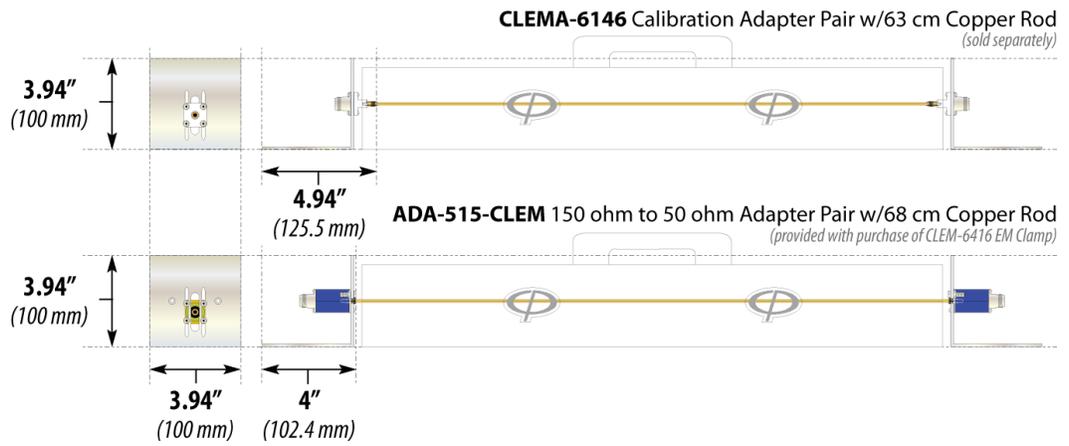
Product Dimensions - EM Clamp Adapters and Accessories
